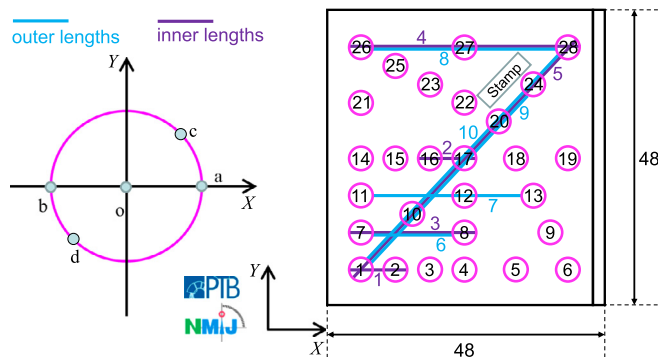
Lengths to be measured on hole plate on the right (simplified sketch taken from [4]; outer dimensions in mm). Measurement of hole plate is performed near the middle plane (plate thickness 8 mm). Hole plate features a bevel on top right side and an identification stamp. Diagram on the left shows the location of probing points a–d inside each hole (e.g. point id 7b indicates point b at hole No. 7).
